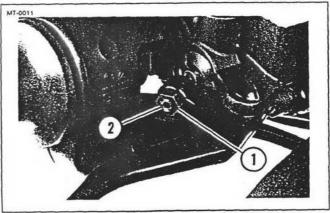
Front Brake Control Lever Free Play Adjustment
